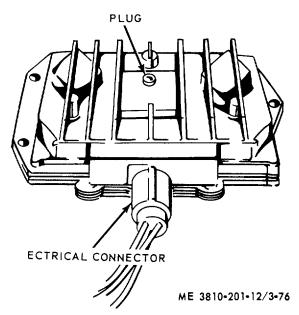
Alternator voltage regulator, adjustment, removal, and installation.
